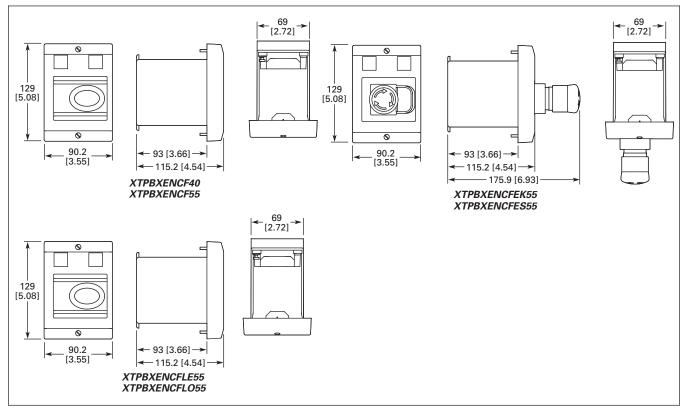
Insulated Enclosures for Flush Mounting of XTPB Manual Motor Protectors (Approximate Dimensions in mm [in])
